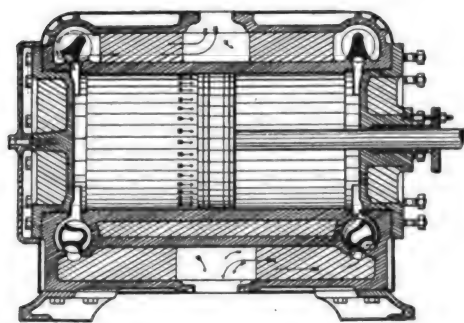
SECTIONAL VIEW OF HIGH-SPEED CYLINDER AND STEAM CHEST.
